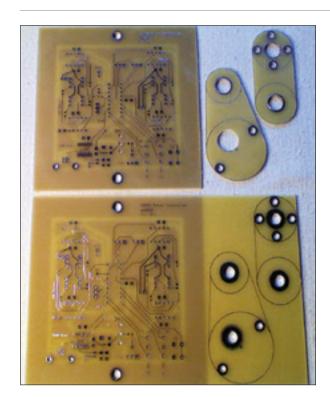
WRAPS circuit boards. [Photo courtesy Mark Spencer, WA8SME]
